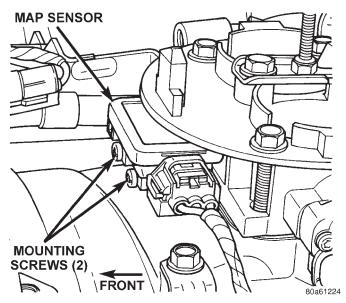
MAP Sensor Mounting Screws—5.2L/5.9L Engines
